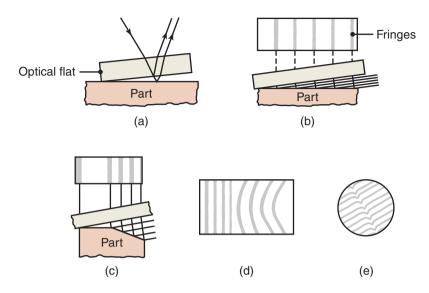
(a) Interferometry method for measuring flatness with an optical flat. (b) Fringes on a flat, inclined surface. An optical flat resting on a flat workpiece surface will not split the light beam, and no fringes will be present. (c) Fringes on a surface with two inclinations. Note that the greater the incline, the closer together are the fringes. (d) Curved fringe patterns, indicating curvatures on the workpiece surface. (e) Fringe pattern indicating a scratch on the surface.
